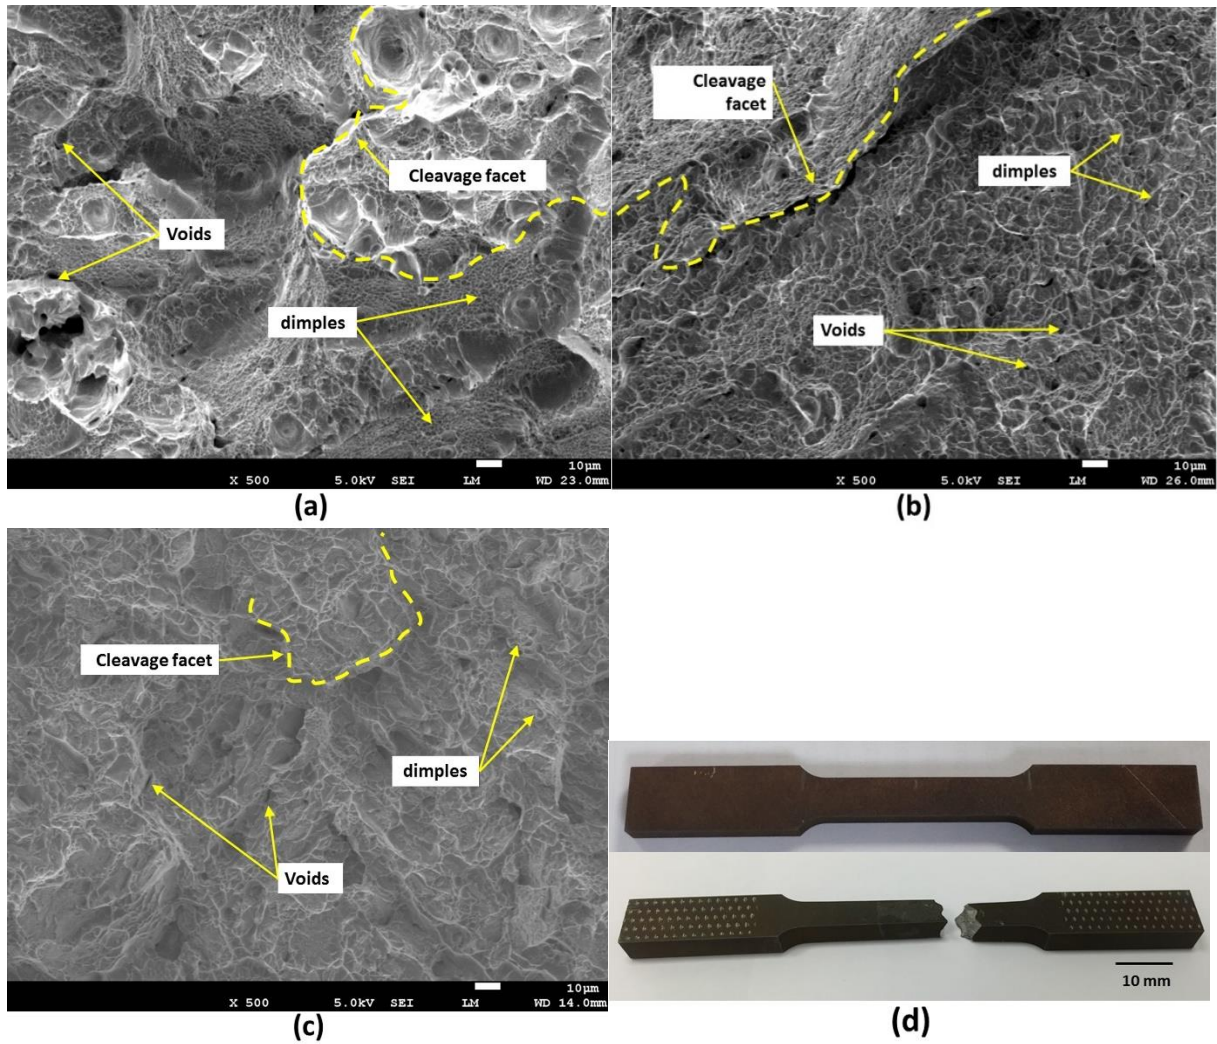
Fracture surfaces after tensile test (a) TiTa (b) Ti6Al4V (c) commercially pure titanium samples and (d) samples of tensile test coupon before and after fracture.
